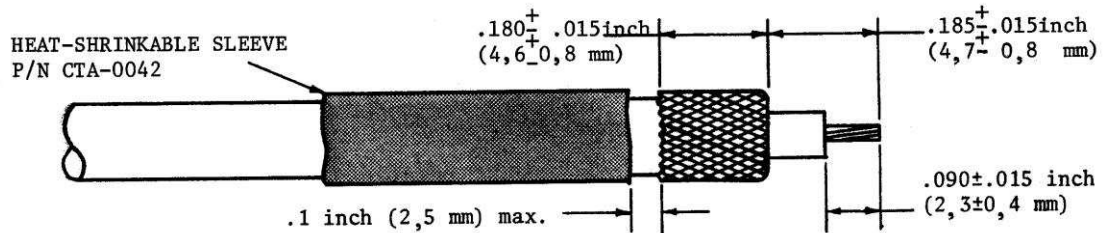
RG- 178 COAXIAL CABLE DIMENSIONS
